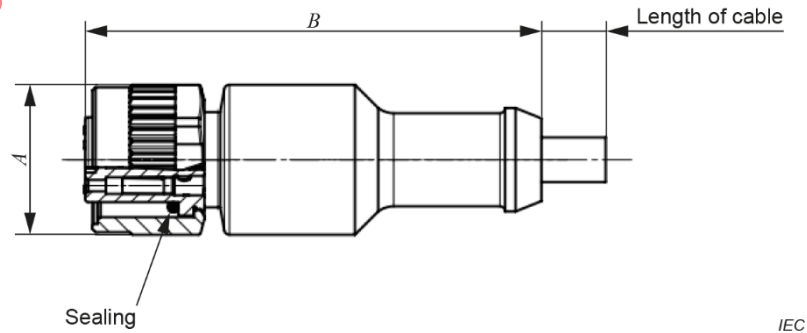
Non-rewirable connector, female contacts, straight version, with locking nut
